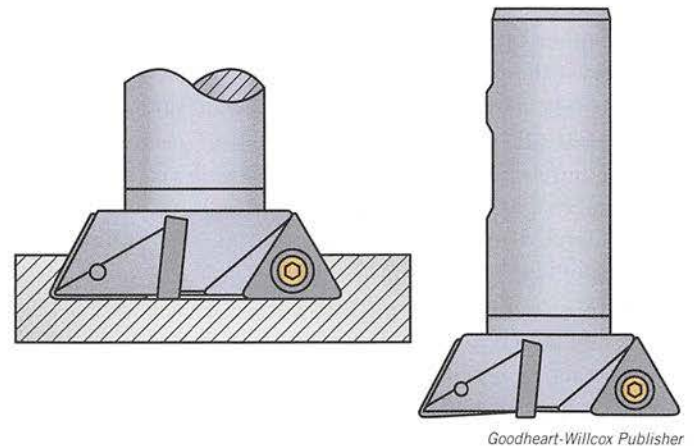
A T-slot milling cutter and the cut it produces.
